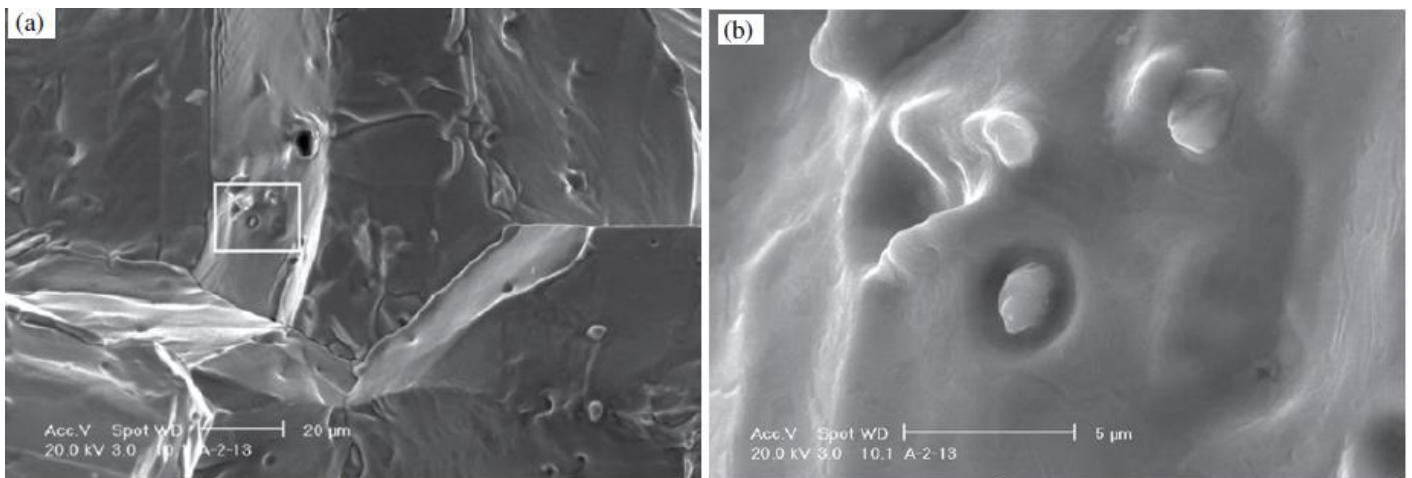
Liquation cracking profile in steel forging.
